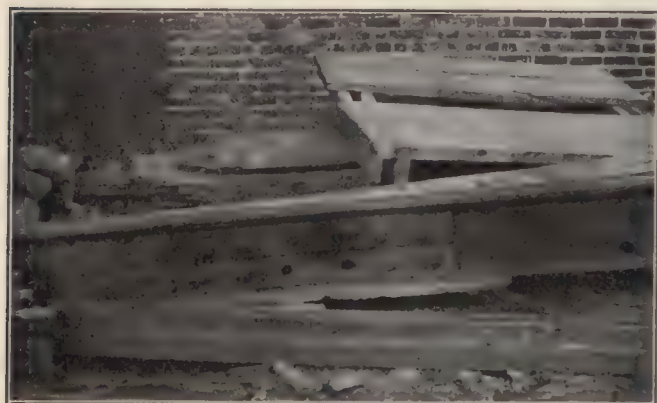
FROG AFTER WELDING ON BASE PLATE BUT BEFORE WELDING JOINT PLATES
